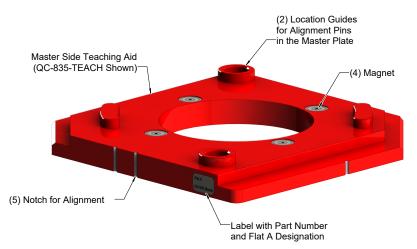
Master Teaching Aid Assembly (QC-835M Shown)
